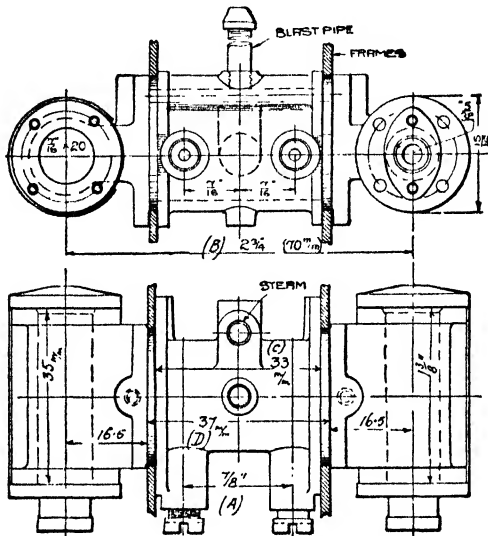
Standard Model Outside Cylinders with Cross-connected Steam Chests ; No. 1 Gauge Size.
